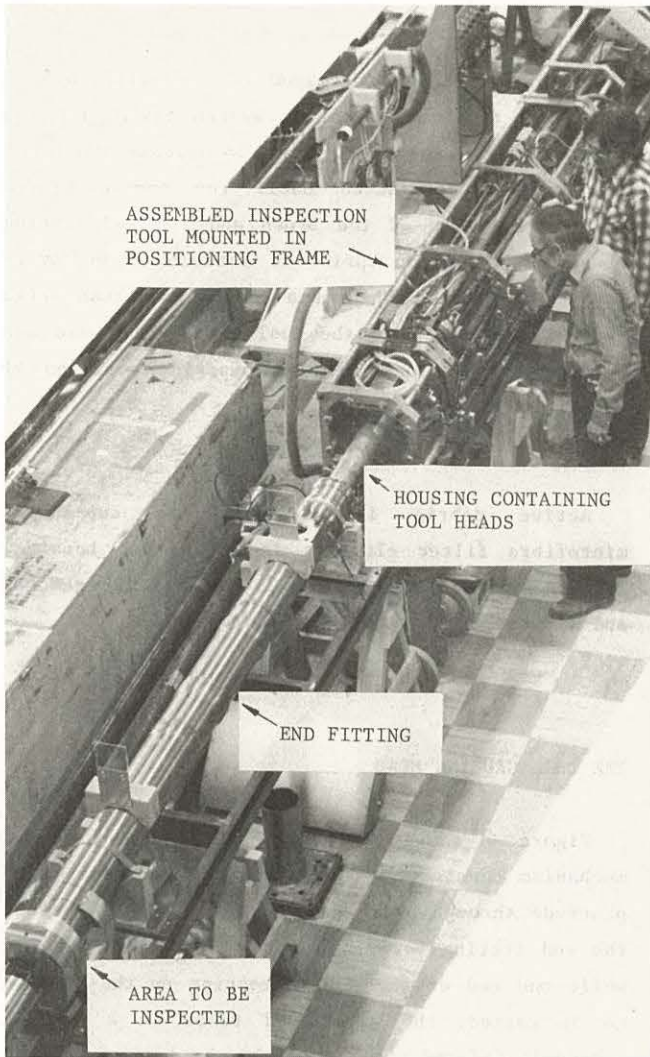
GENERAL VIEW SHOWING COMPLETE TOOL
